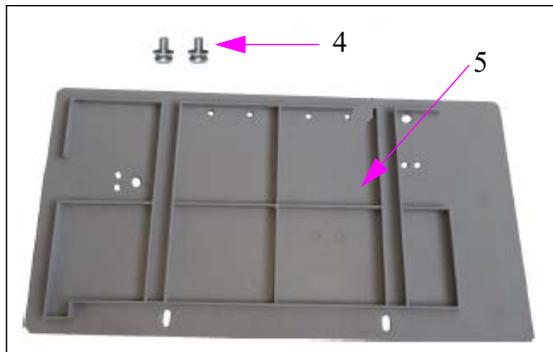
Cellular Modem Module Assembly Parts (6-9)
